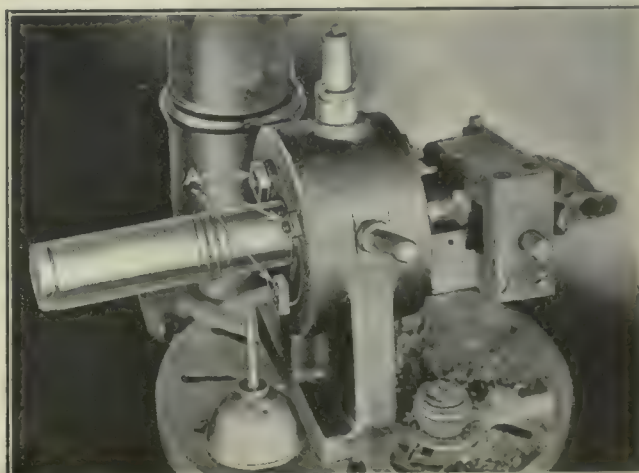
JIG WITH PIECE IN POSITION FOR DRILLING
